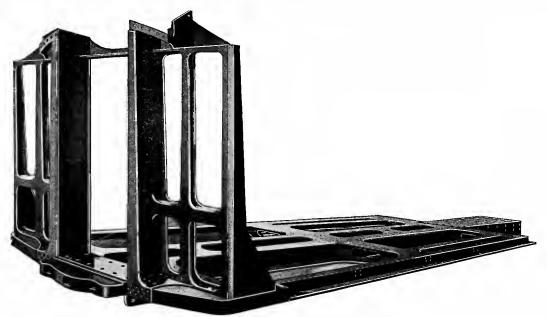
Commonwealth Steel Company's Upright End Frame in One Piece, and Commonwealth Combined Platform and Double Body Bolster for Non-Vestibule Cars.
